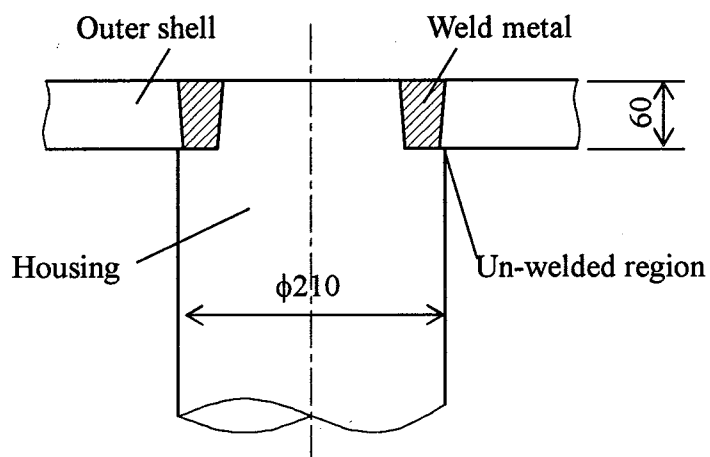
Plug Weld between Outer shell and Housing
